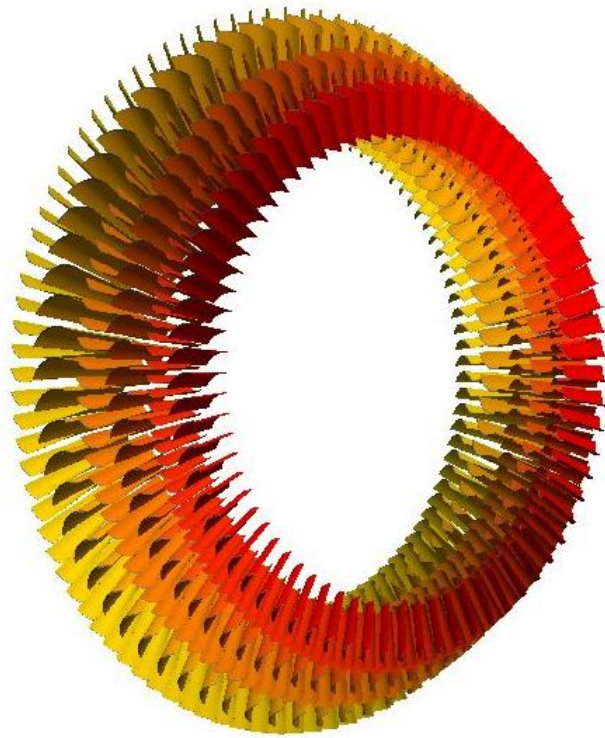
T-AXI three-spool IPT blading, inlet view
